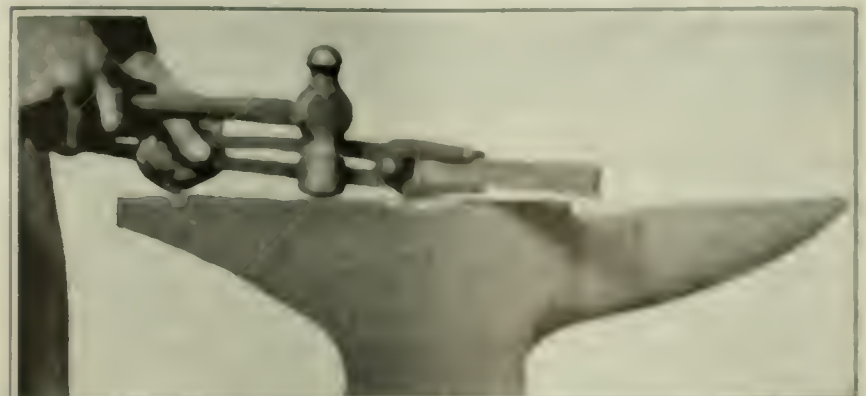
HOLLOW-BIT TOOL IS SHAPED TO STOCK
